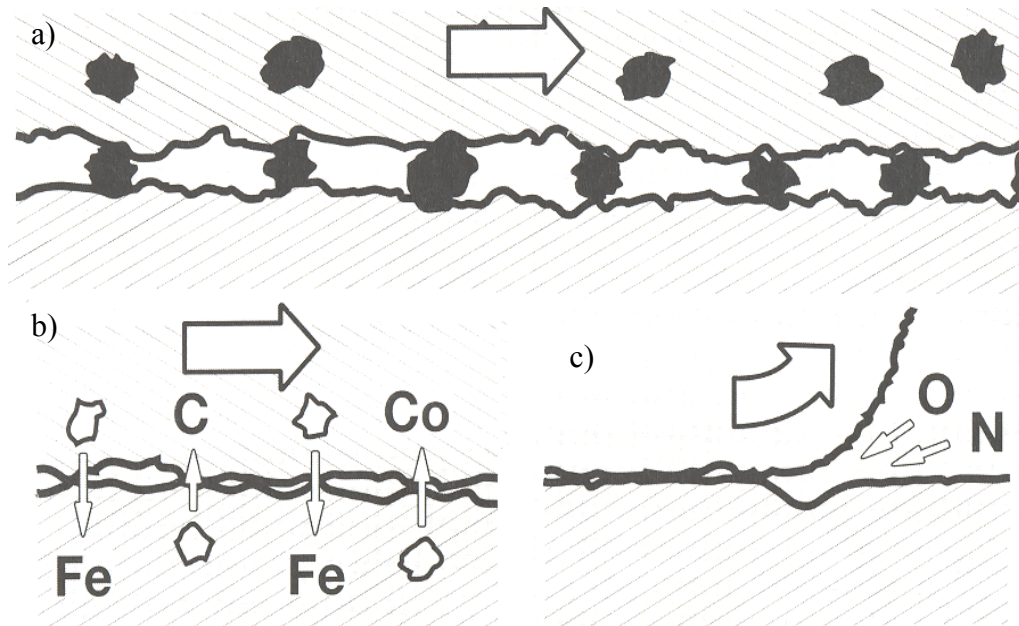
A schematic illustration of different tool wear mechanisms during machining (a) abrasive wear; (b) diffusion wear and (c) oxidation [27]
